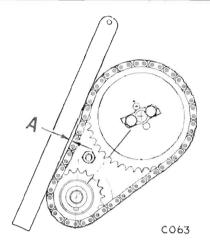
Checking timing chain for wear Dimension "A" should not exceed 0.4" (10 mm.)
